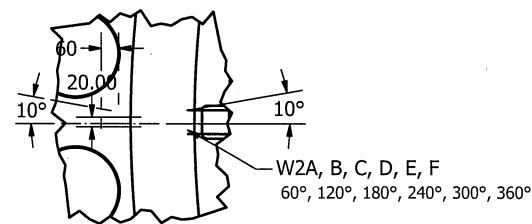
A-E-15, Watts Bar Nuclear Plant Unit 2 – Reactor Vessel Weld Seams
